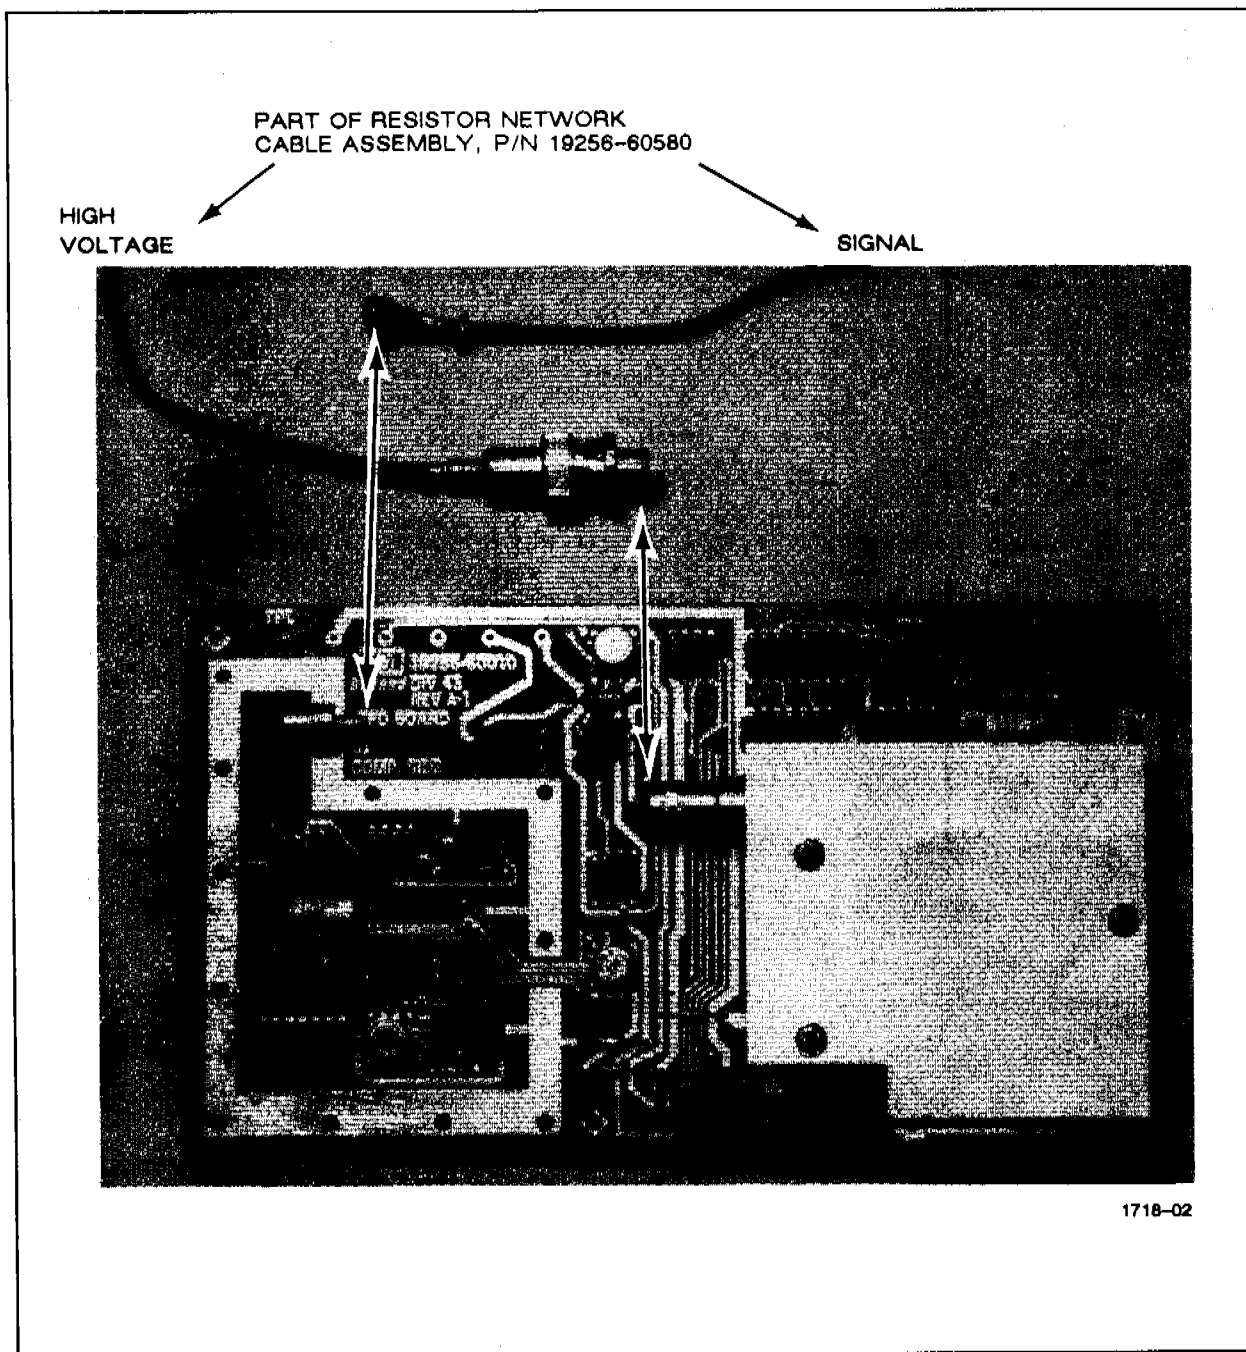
FPD Printed Circuit Board, Part No. 19256-60010
